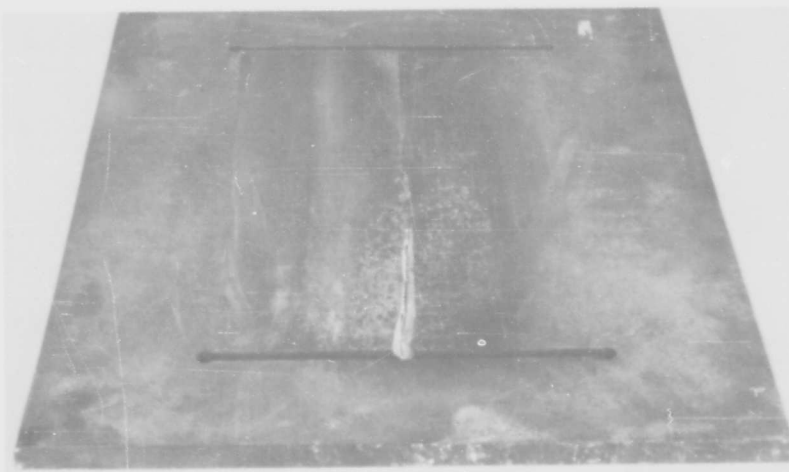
Explosion tear test "flat break" fracture, initiating from a 2-in. crack defect in a 1-in.-thick test plate of a 220 ksi Maraging steel of poor quality .
